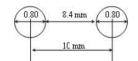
Dimensions [mm] of the holes drilled in the specimen
